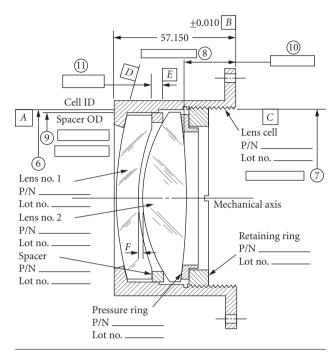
An air-spaced doublet assembled by the "lathe assembly" process. (From Yoder.17)
